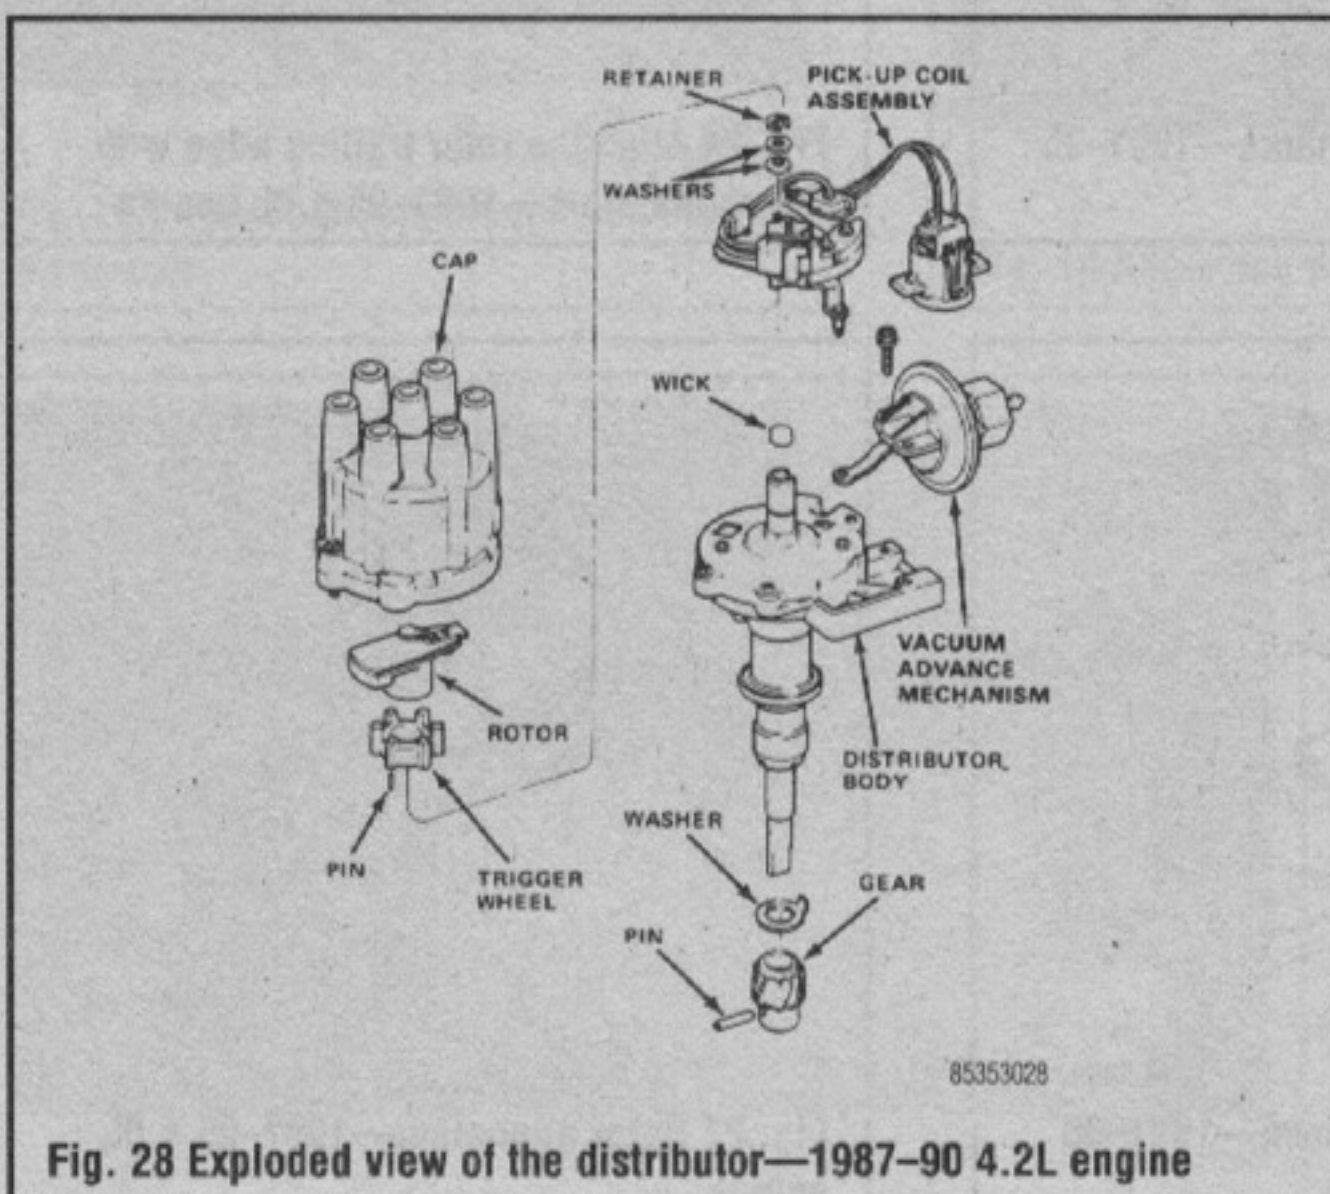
Exploded view of the distributor—1987-90 4.2L engine
